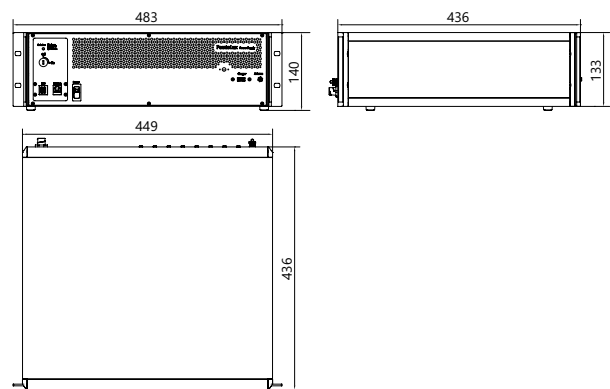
Outline drawing of FemtoLux 19" rack mountable control unit
